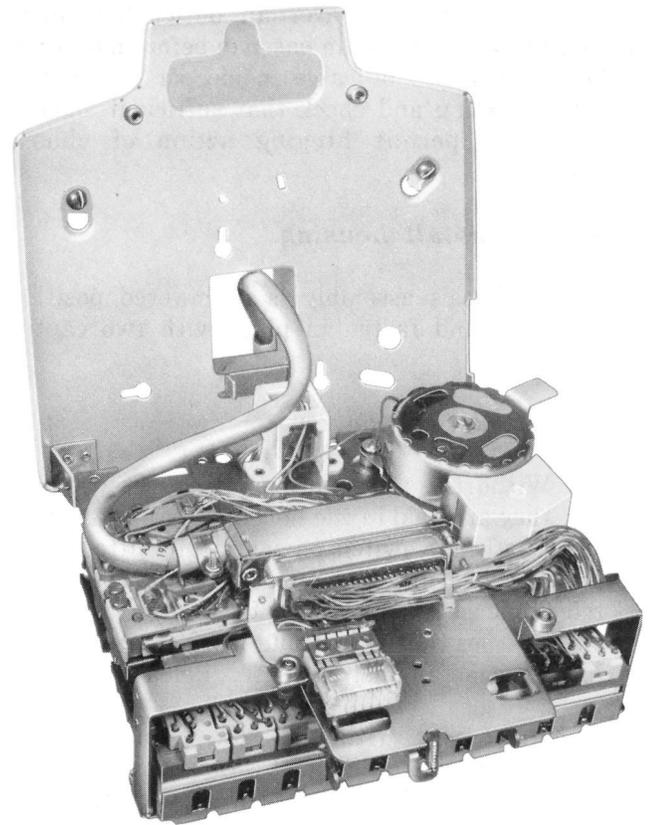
852AM or 2852AM (Later Version) Telephone Set with Hinged Chassis Lowered
